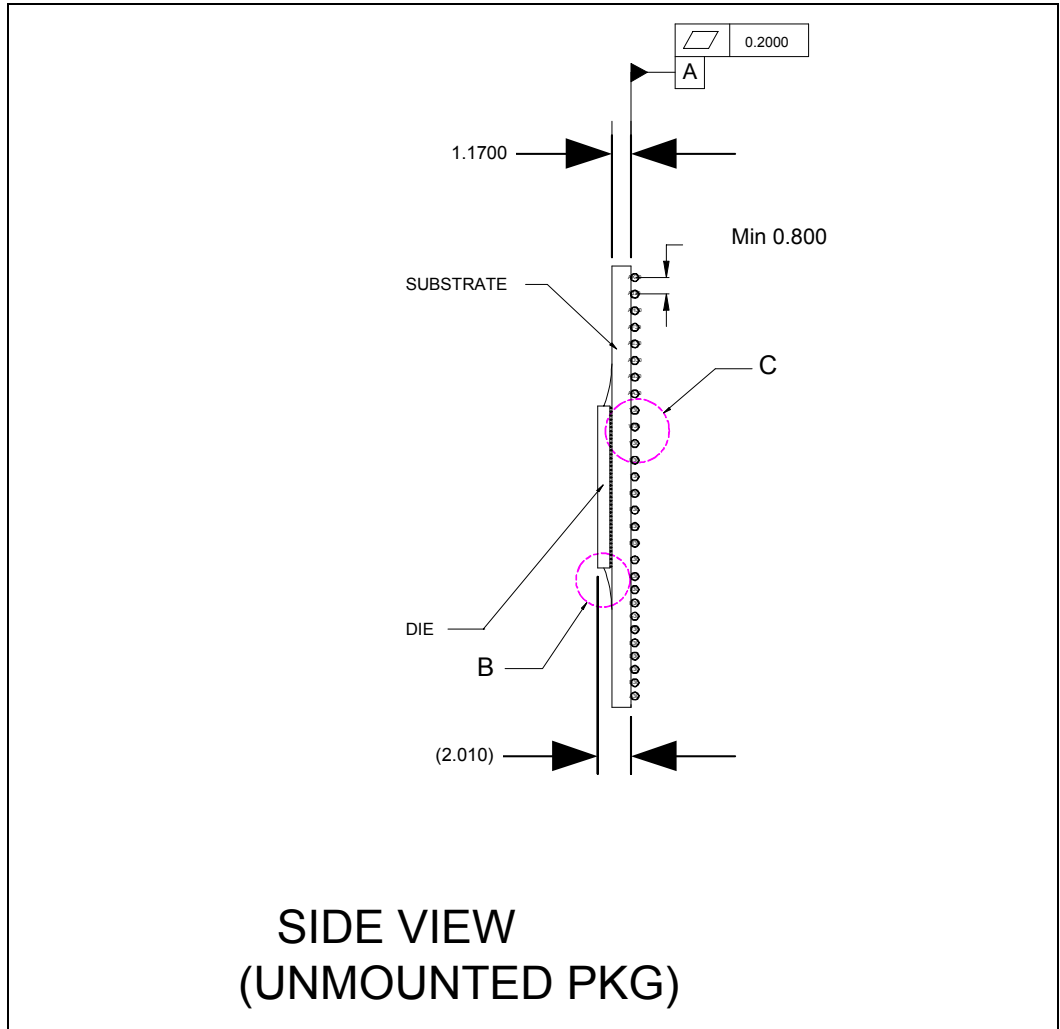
Mobile Intel 915GMS Express Chipset Package Details B & C
